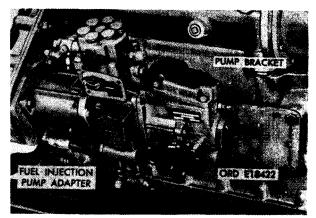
SECURING FUEL INJECTION PUMP ASSEMBLY TO ADAPTER AND INSTALLING PUMP BRACKET ASSEMBLY (EARLY MODEL ENGINES). (5) Figure 499. (A) Position fuel injection pump drive gear on fuel injection pump driven gear hub alining elongated bolt holes in gear with threaded screw holes in hub. The elongated bolt holes allow for adjustment of the gear for precise fuel injection pump timing in relation to engine timing. (B) Position fuel injection pump driven gear retaining plate against driven gear and aline bolt holes. (C) Install three 3/8-inch lock washers and 3/8 x 1- 1/4 cap screws to hold retaining plate until injection pump timing in many function pump timing has been completed.
